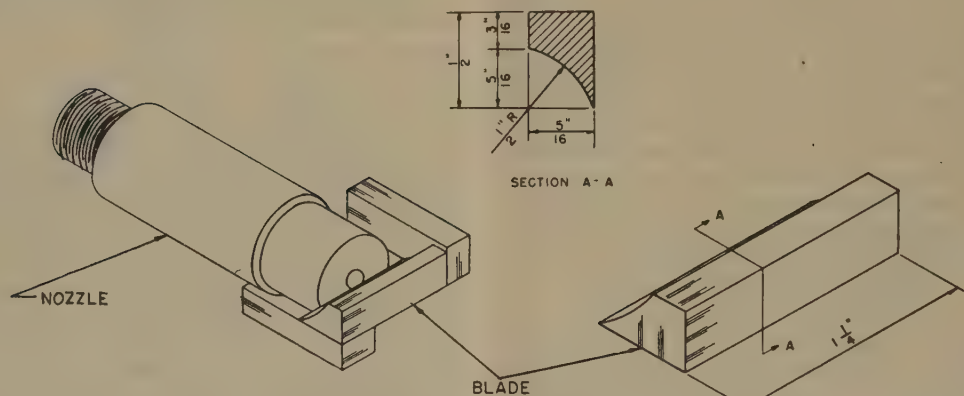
NOZZLE AND SPECIMEN ASSEMBLY FOR GAS EROSION TEST
